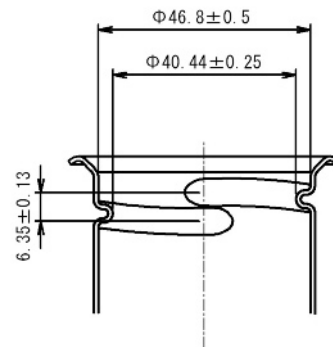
Dimensions of filler pipe regulated by JIS D2501
